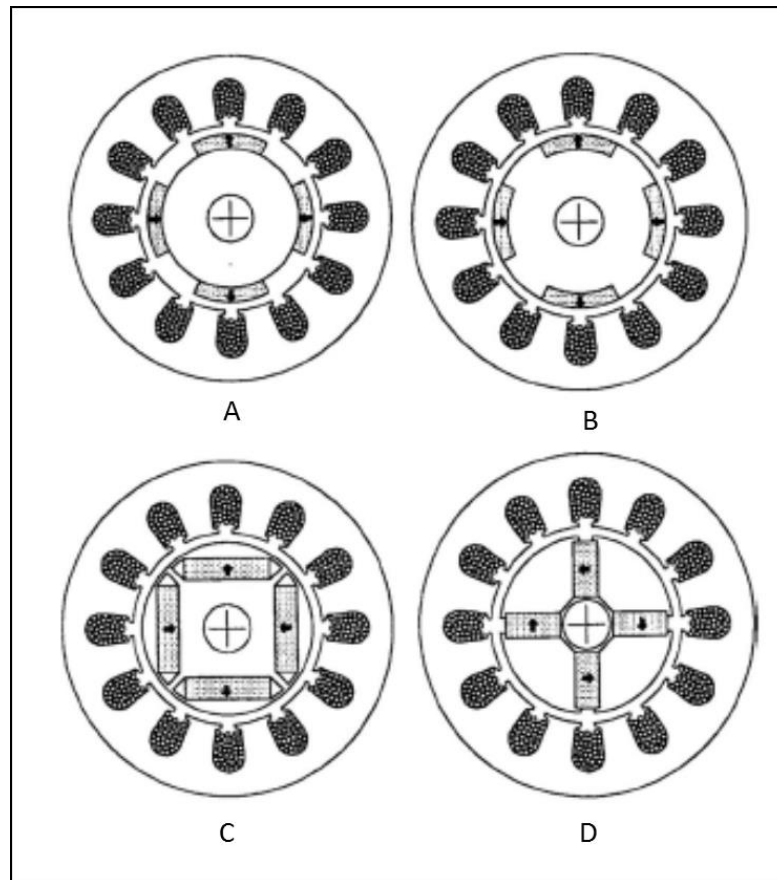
(a) Magnets on Rotor, (b, c and d) Magnets Inside the Rotor [55].
